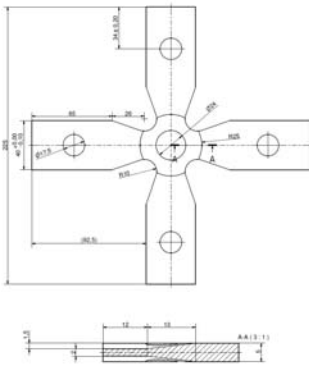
Cruciform specimen. The center part (radius 5 mm) is loaded by CTS.
